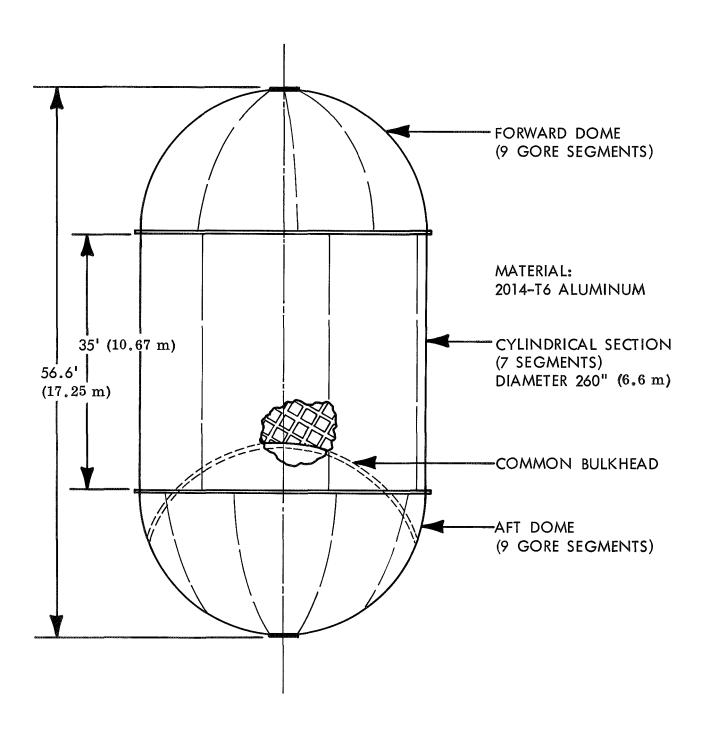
Propellant Tank Structure (Structural Element No. 2)
